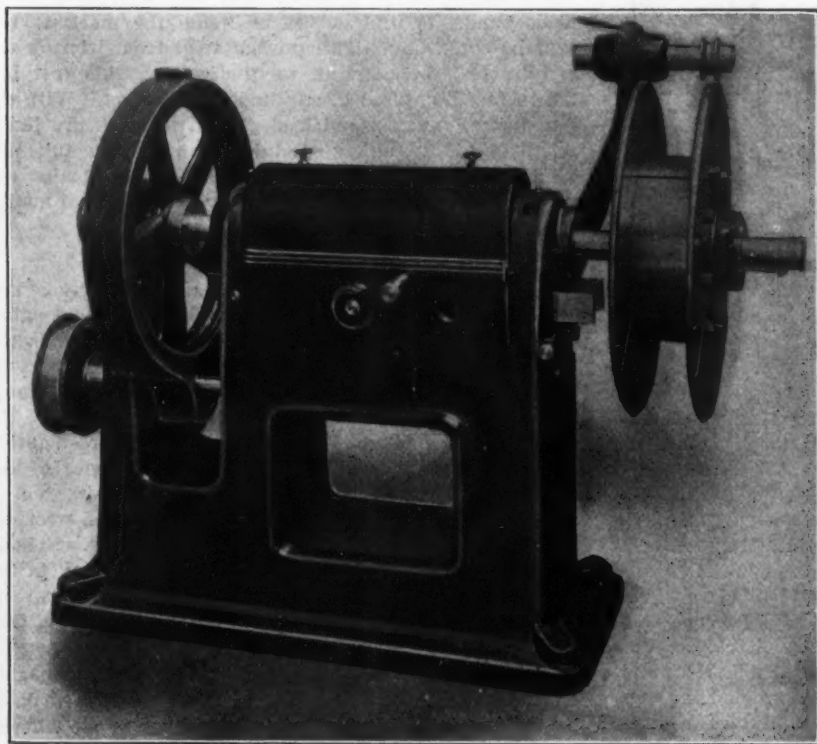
The Coiler of the Schmitz Wire Flattening Mill.
